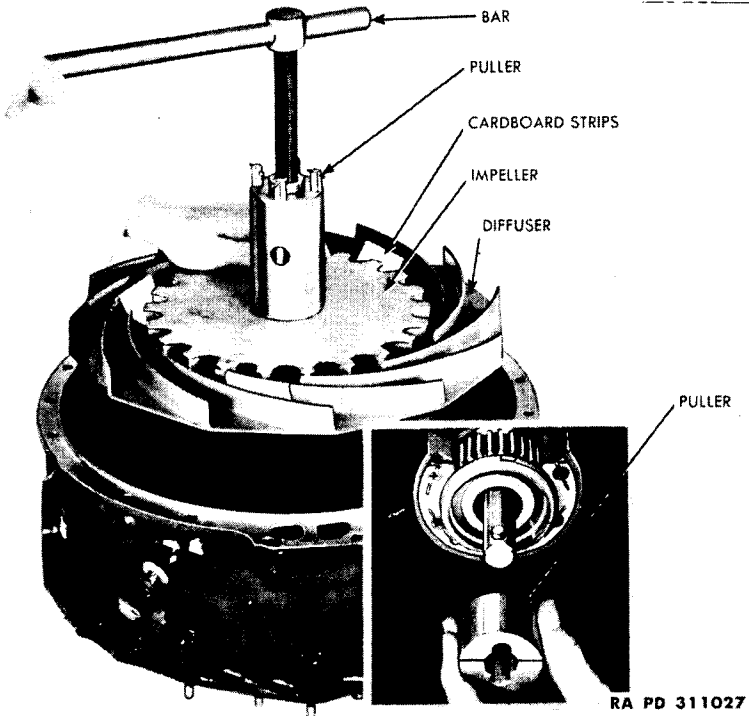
Installing Impeller, Using Puller 5A2263 and Adapter 5A2310
